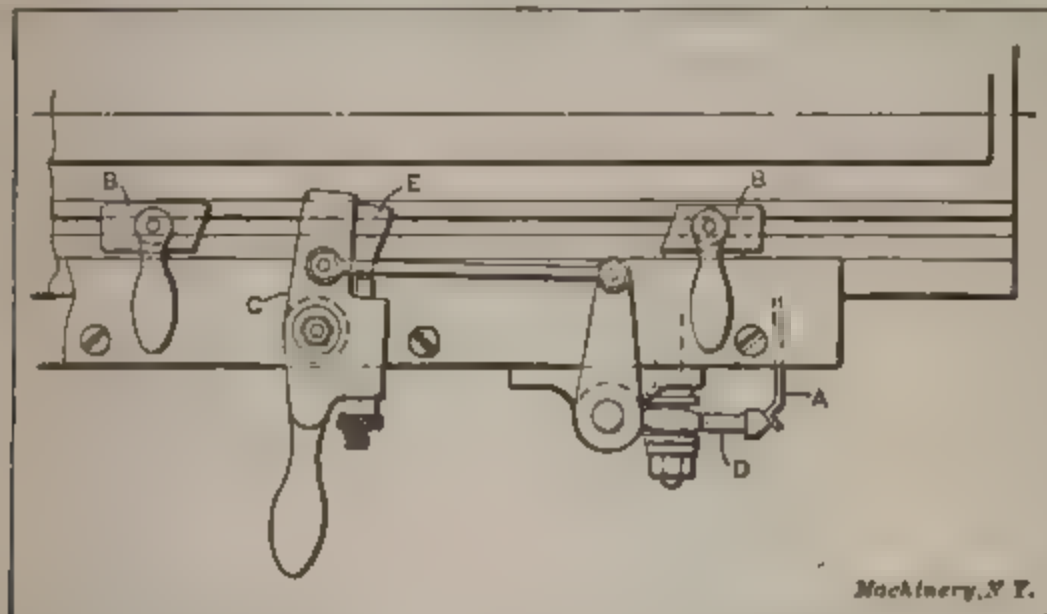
Spring Locking Arrangement for the Shaper-reversing Mechanism
